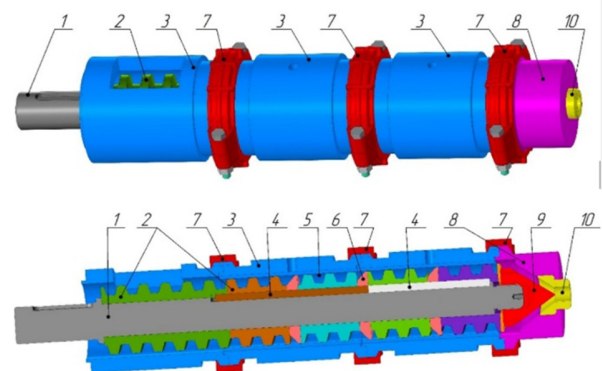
Screw assembly (compression unit) of the extruder: 1 – screw shaft, 2 – feeding screw, 3 – housing, 4 – key, 5 – horizontal grooves of the housing, 6 – compression gate, 7 – coupling, 8 – die head, 9 – conical tip, 10 – die plate (nozzle).
